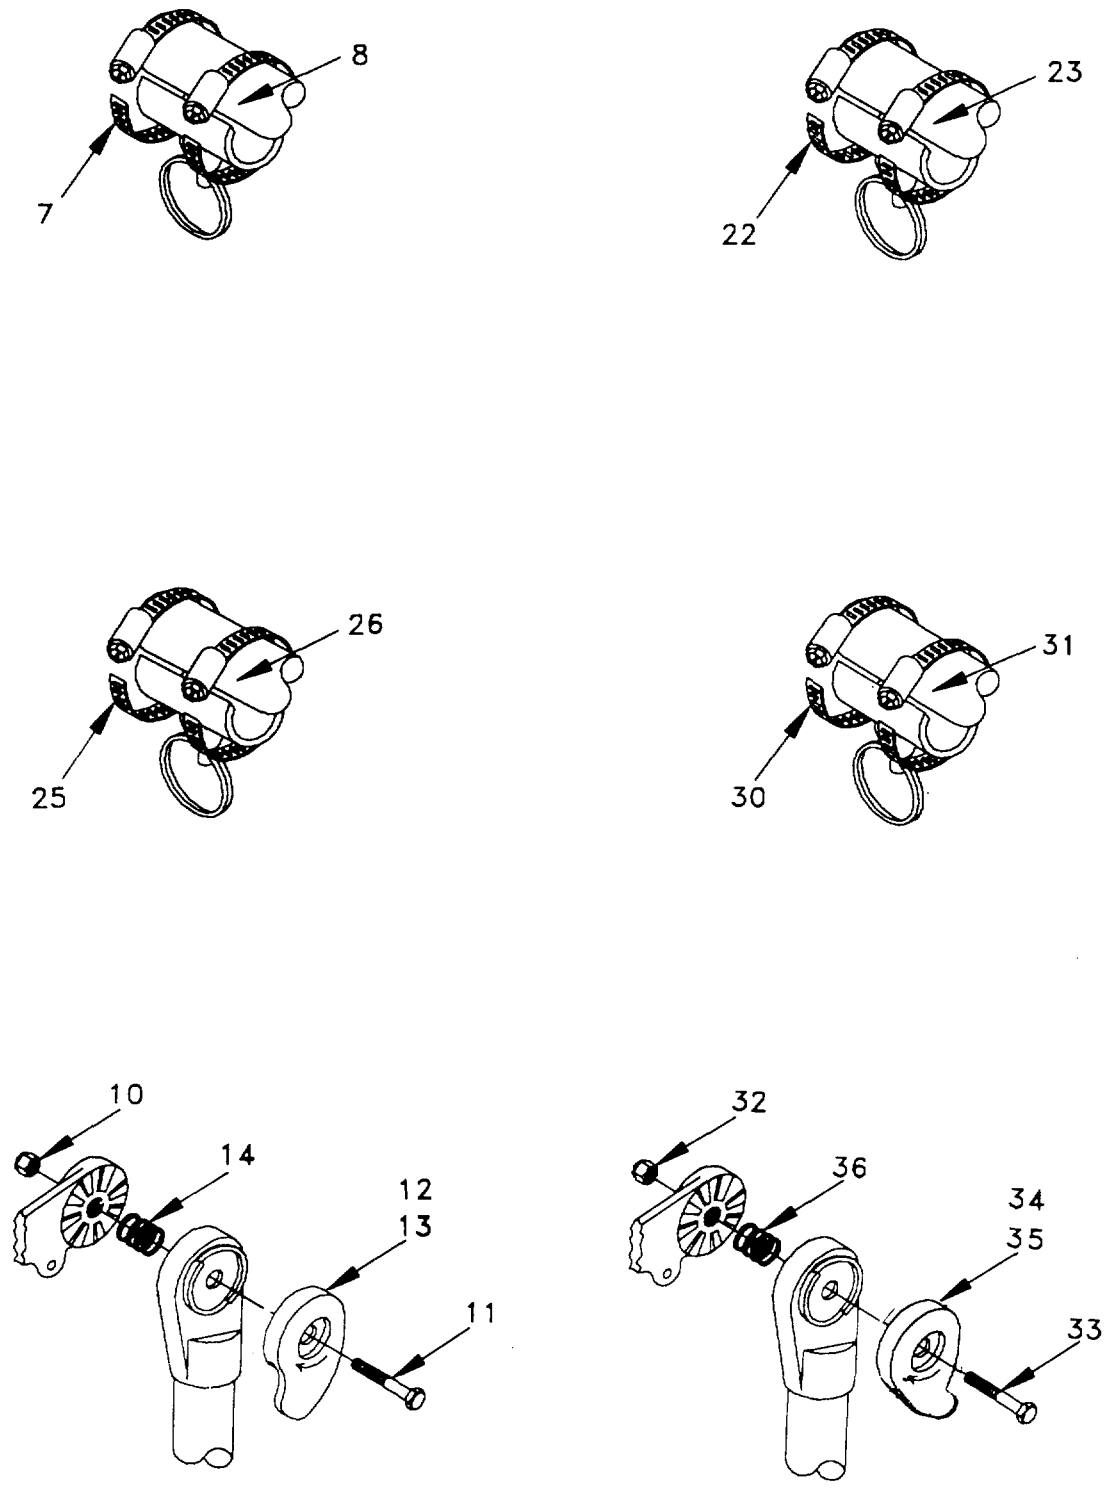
Tent Frame Assembly (Sheet 3 of 3)
